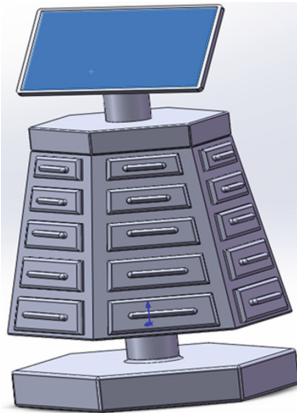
Outline drawing of tower type intelligent storage cabinet
